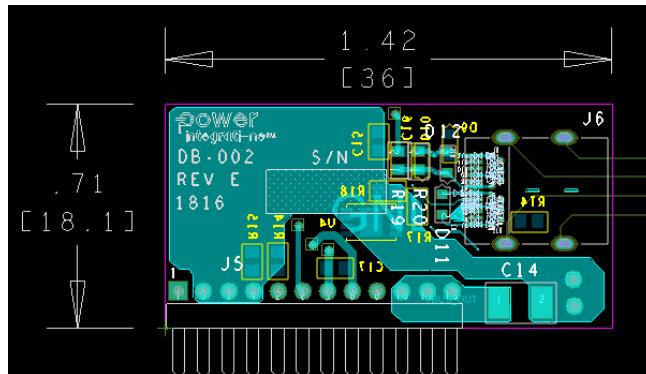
Printed Circuit Layout, Daughter board, Top.
